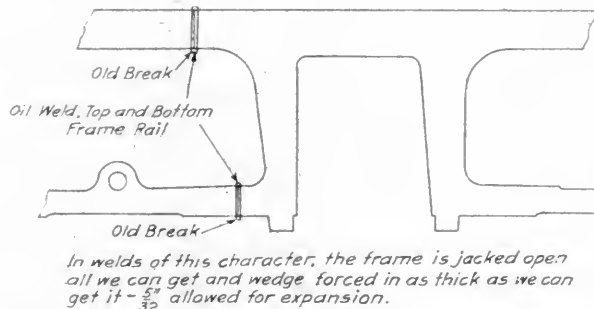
Difficult Oil Weld, Top and Bottom Frame Rails
